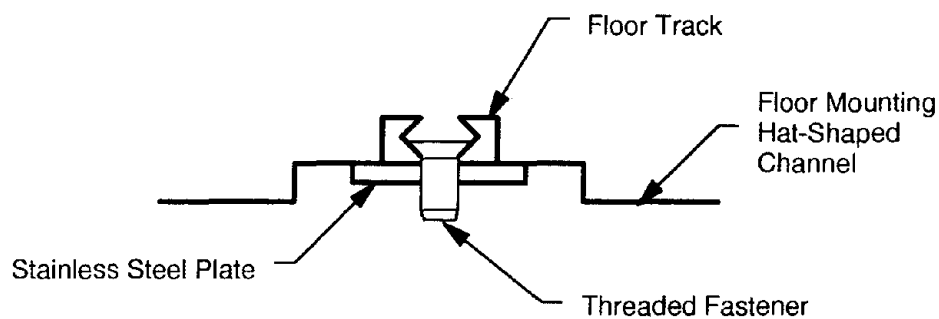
Sketch of Floor Track Mounted on Hat-Shaped Channel
